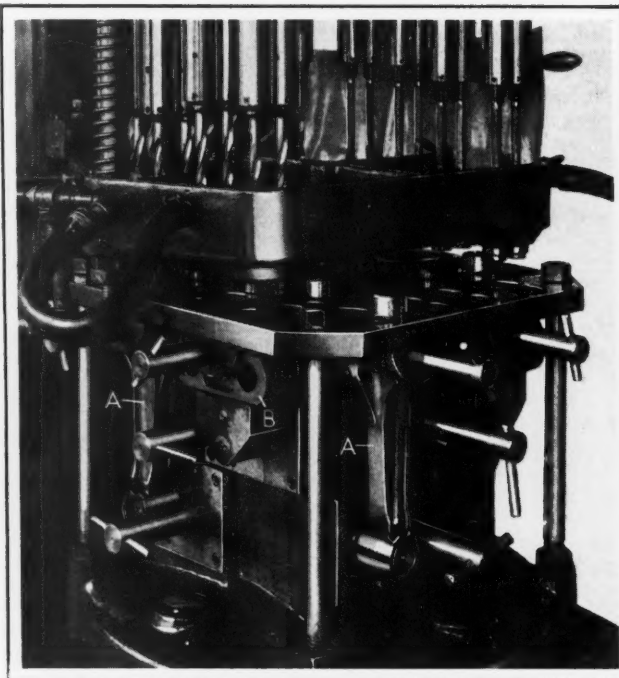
Producing the Stud Holes in Master Rods and Caps
